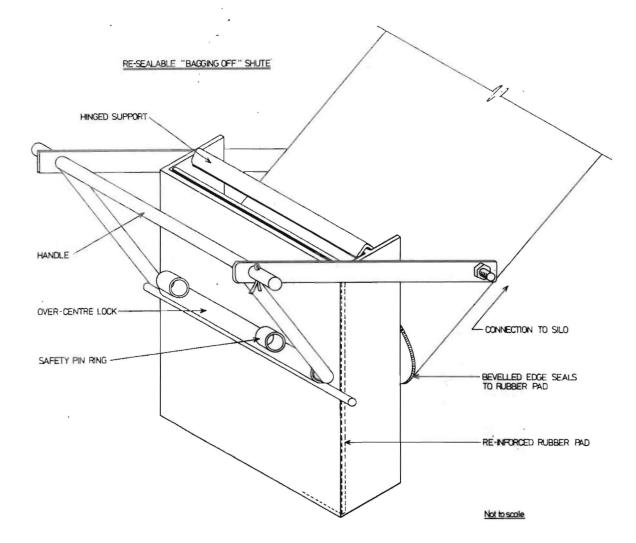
Design for a sealable bagging-off chute for a farm bin.
